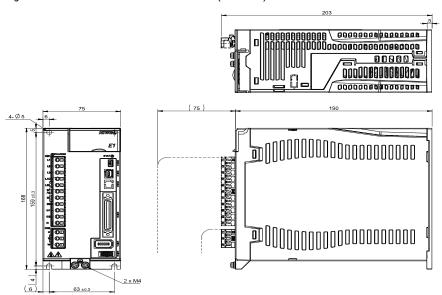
The dimensions of 1 kW/1,2 kW servo drive (Standard)
